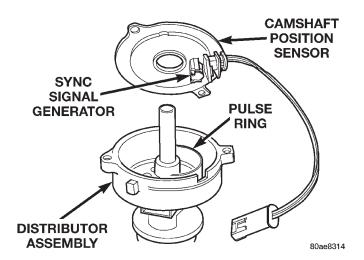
Camshaft Position Sensor—Typical (5.2L/5.9L Distributor Shown)
